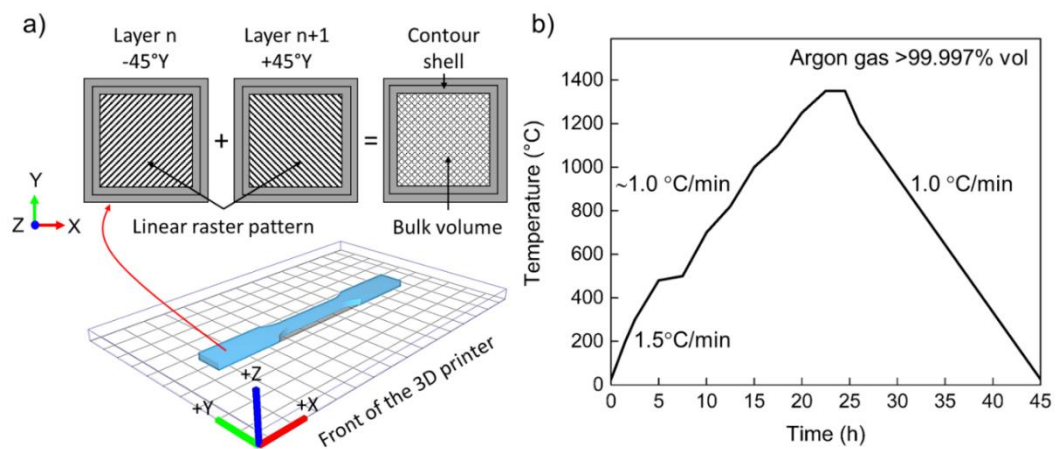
a) Test specimen, 3D printing strategy, and b) thermal profile used for sintering
